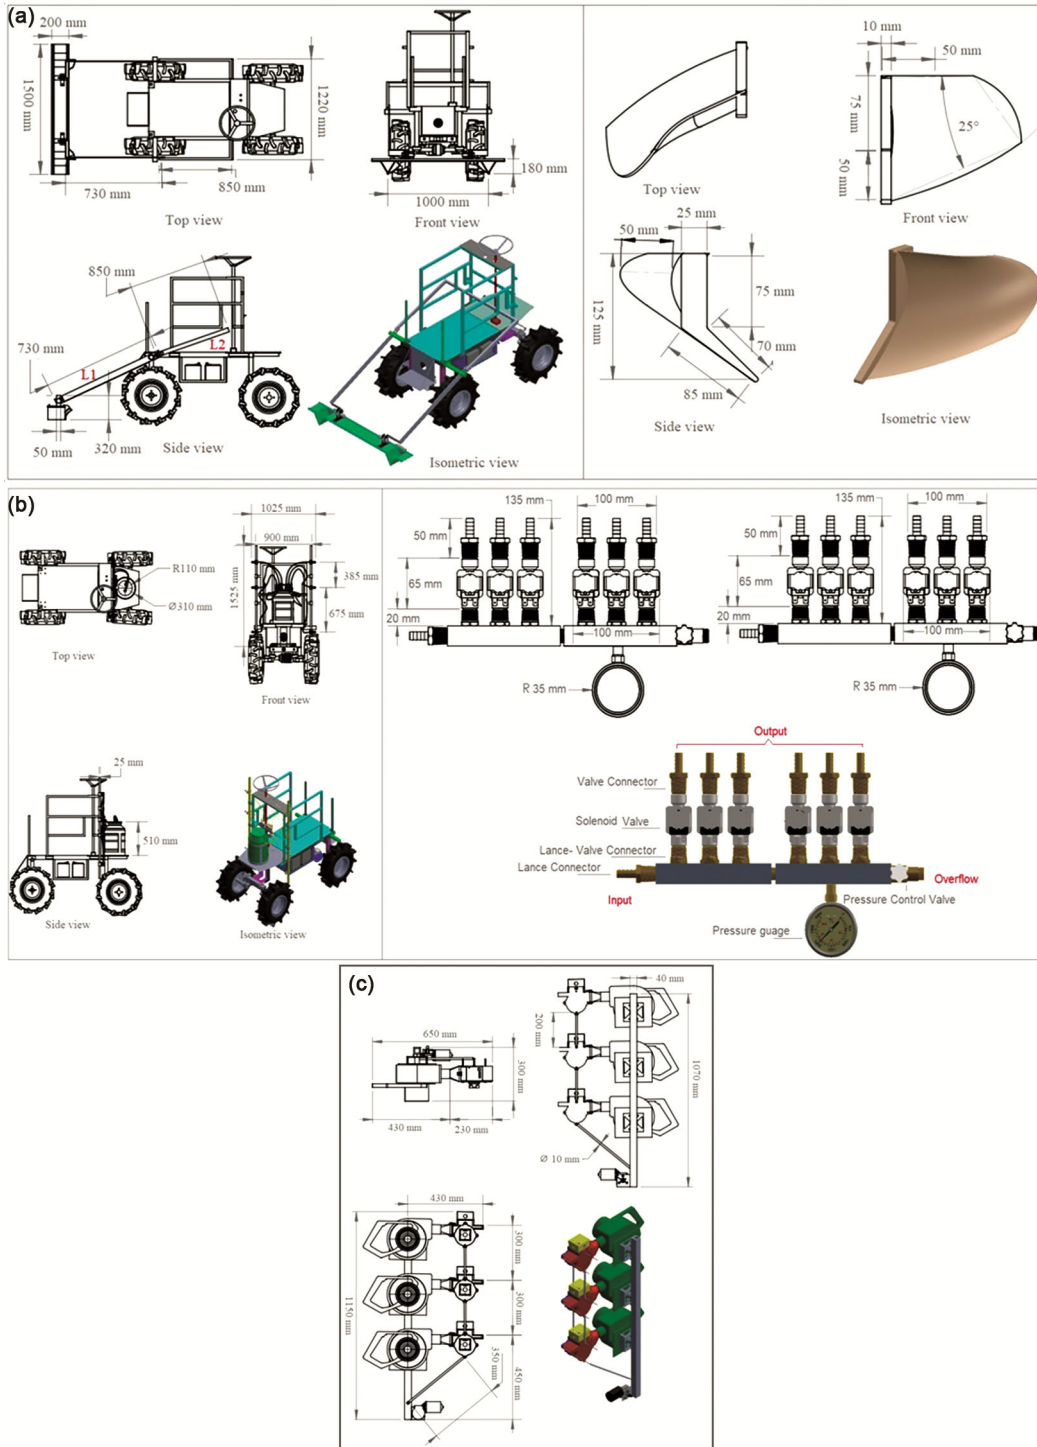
Details of (a) Bed former and Forming board frontal plane, (b) Sprayer and distributor, and (c) Pollinator boom
